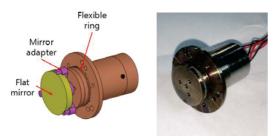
Fast steering mirror to correct tilting error: (a) solid (b) photograph of the manufactured fast steering mirror
